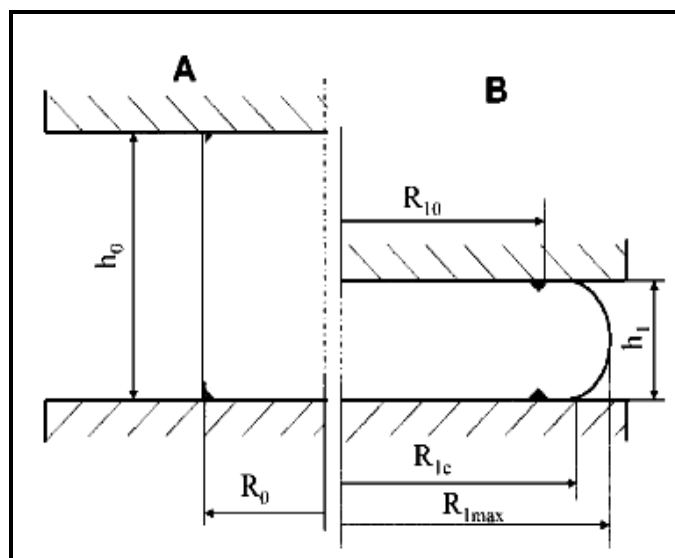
Workpiece and die configuration in cylinder upsetting
